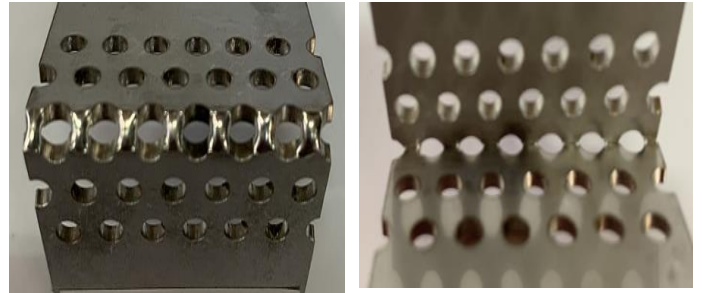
Perforated sheets, temporarily welded (points), corner, 1.5 mm thick, steel 1.4301(304), (B1, B2)
